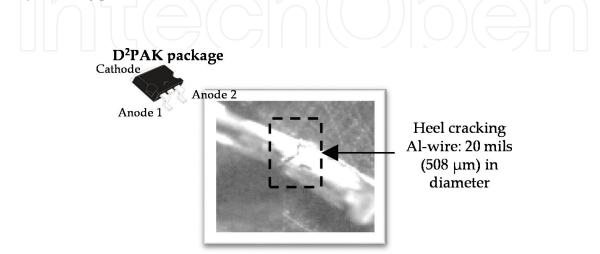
Aluminum wire heel cracking (2 × 20 A, 170-V Schottky diode assembled in a D<sup>2</sup>PAK package).
